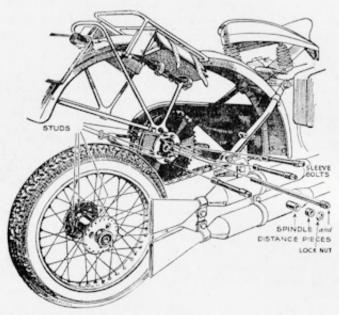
Showing Arrangement of Quickly Detachable Rear Wheel and Hinged Mudguard
